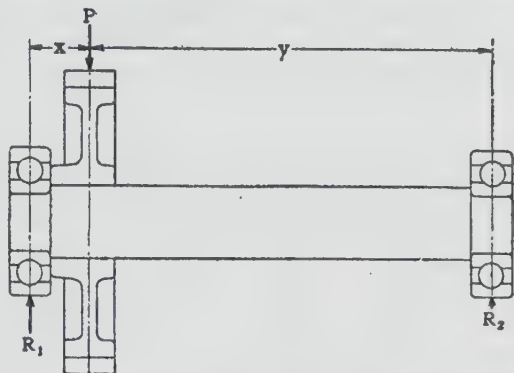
DISTRIBUTION OF TOOTH PRESSURE BETWEEN BEARINGS.
